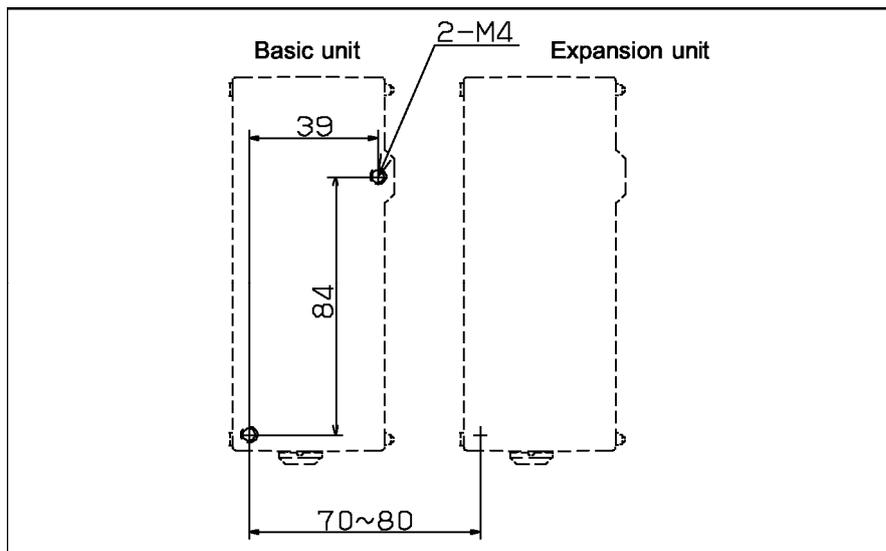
(j) Horizontal separation of mounting holes during installation
